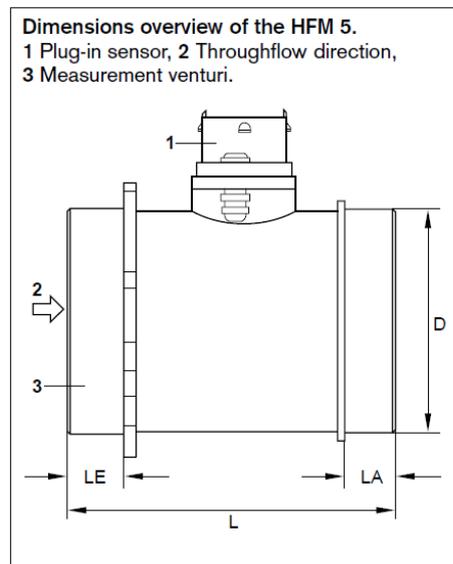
Schematic drawing of Bosch sensor (Bosch, 2018)
